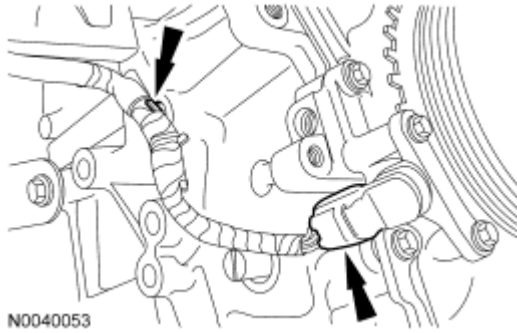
Locating Crankshaft Position (CKP) Sensor Electrical Connector And Harness Pin-Type Retainer
